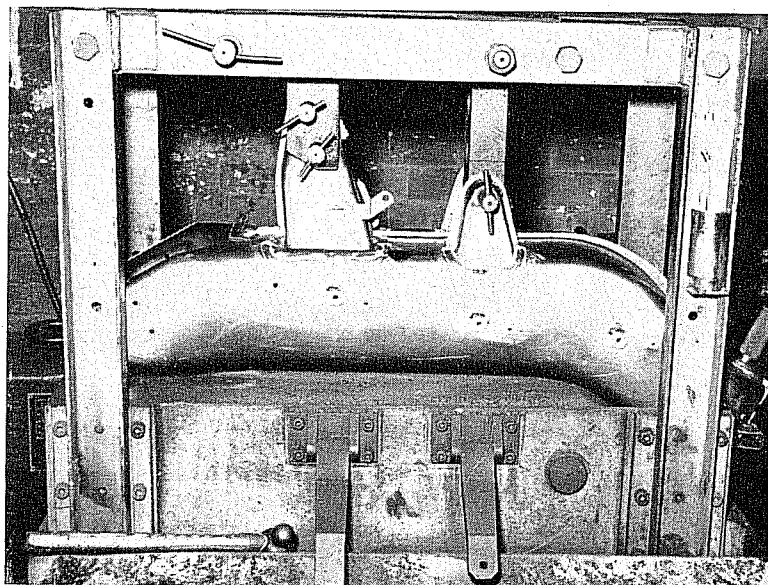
Frame assembly jugged for final welding of engine-mounting brackets, mudguard support bracket and six panel nuts
